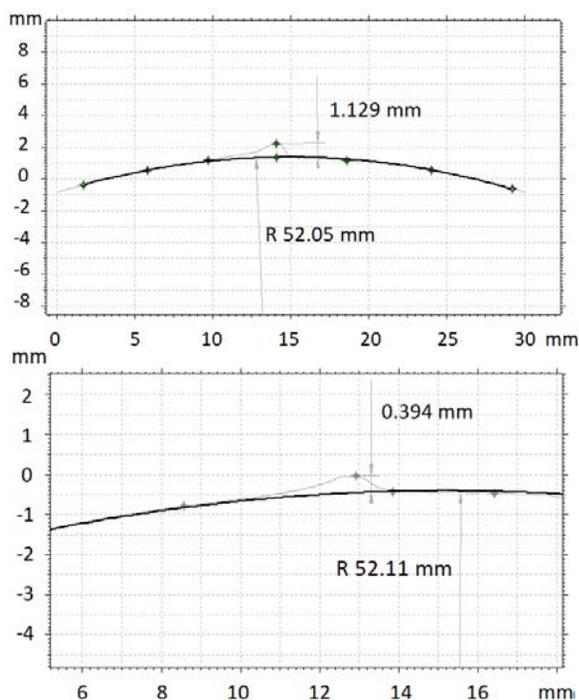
Surface profile: a) before and b) after flash removal through vibratory machining
